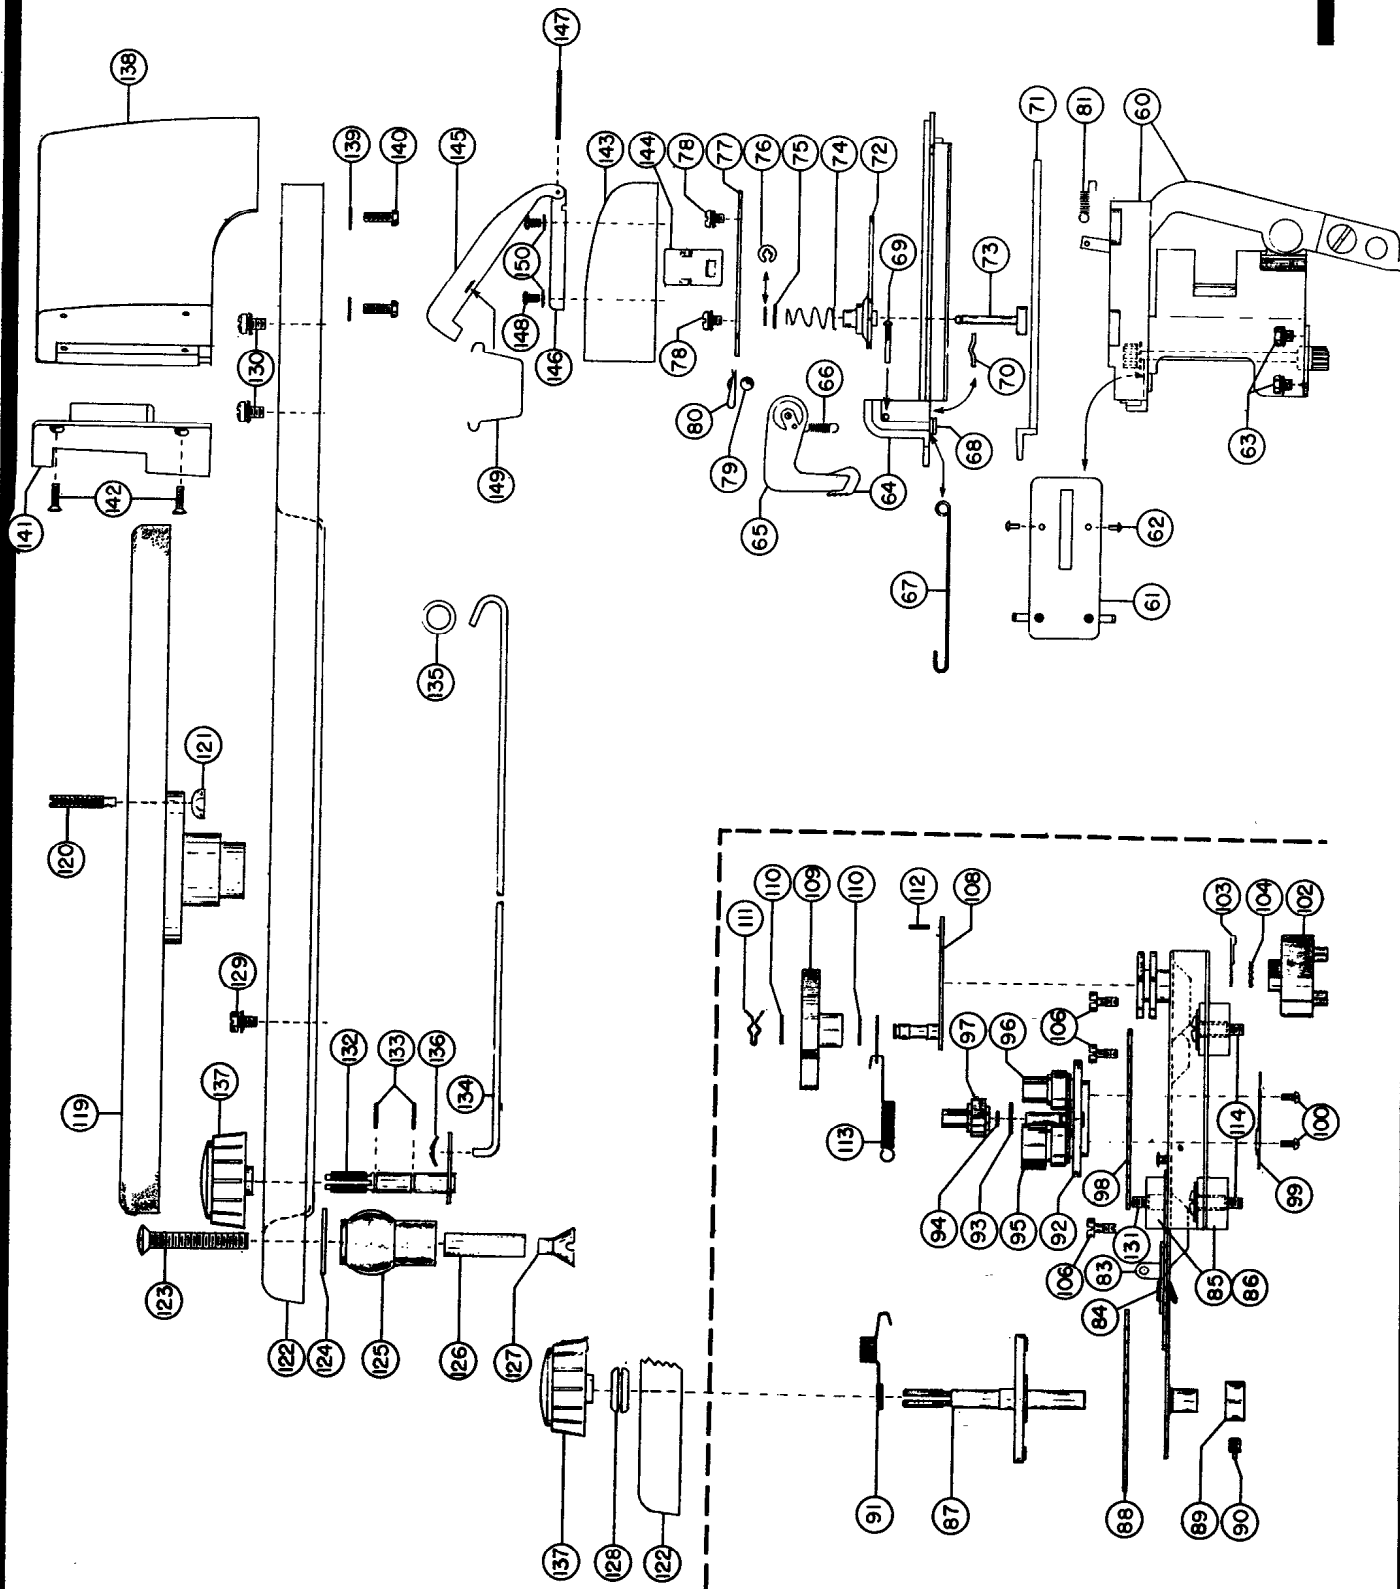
MOTOR & SPEED CHANGING ASSEMBLY
